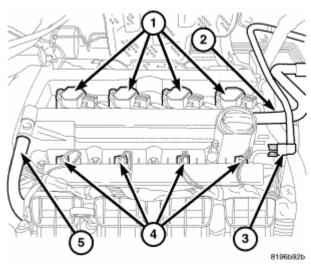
COIL CONNECTOR Courtesy of CHRYSLER LLC
